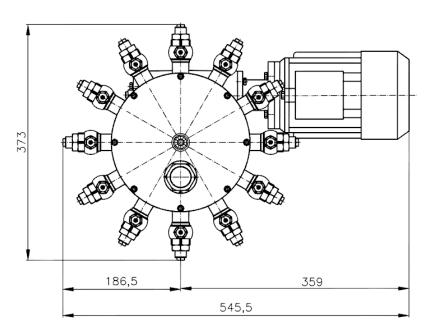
Dimensional drawing VEG - 12 outlets without reservoir
